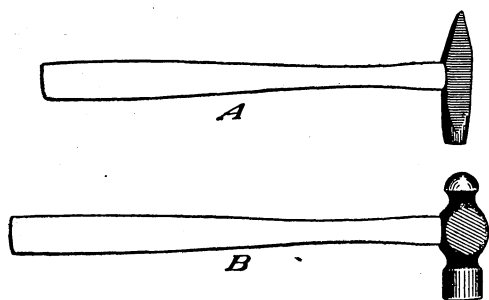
Riveting hammers: A, ordinary riveting hammer; B, machinist's hammer.
